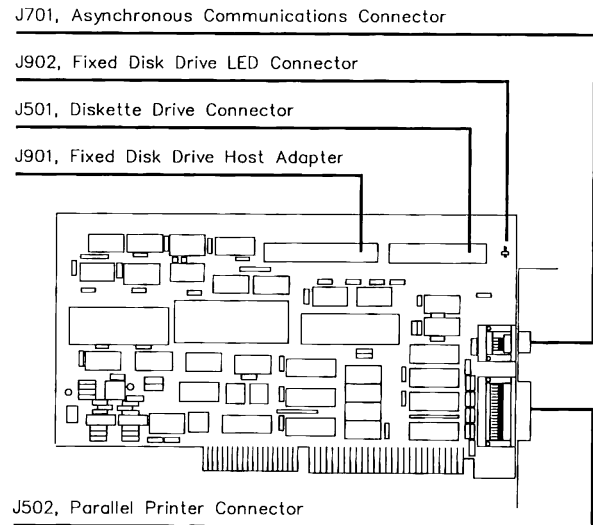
Multipurpose Fixed Disk Drive Controller Board Connector Locations
